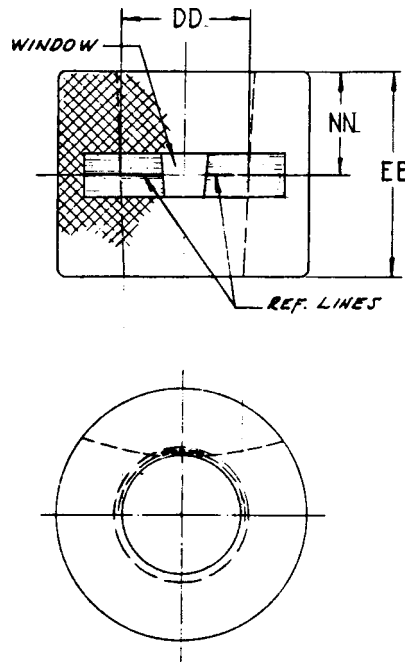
Master Ring Gage for Single Straight-Bore Stopcocks
